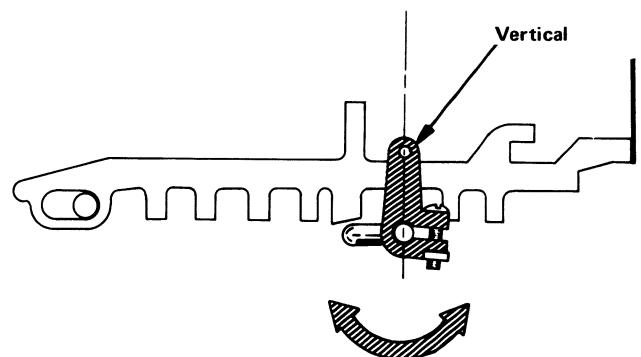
Filter Shaft Clutch Release Bellcrank
